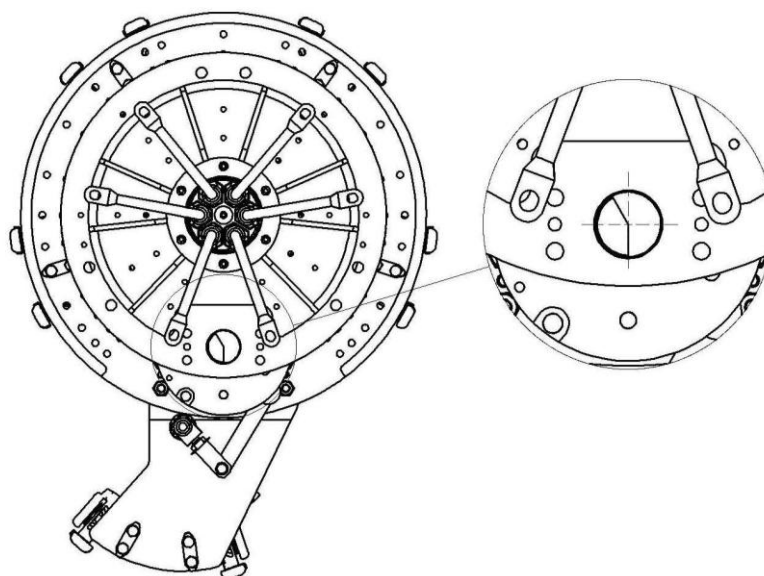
Ready-to-be-assembled position of the incoming shaft of the selector
